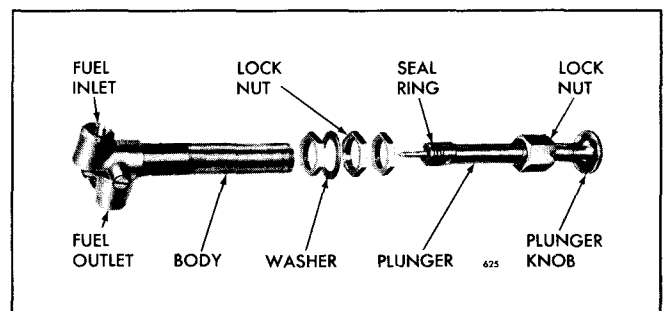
Fuel System Priming Pump and Relative Location of Parts
